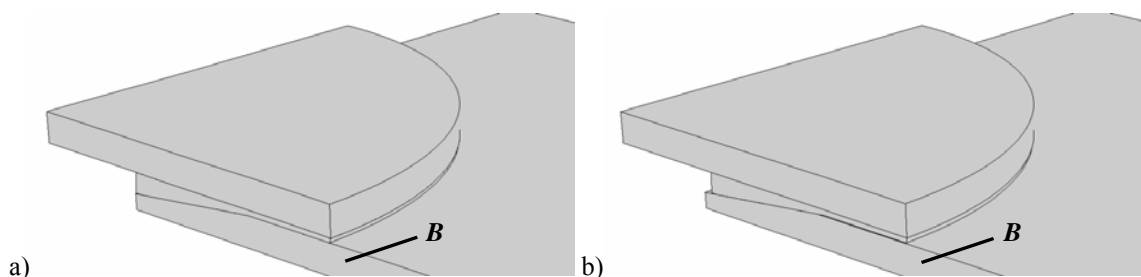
Deformed shape of the 0.6 mm laminate outer chamfer repair at damage onset (a) and patch debonding (b) (compressive load).
